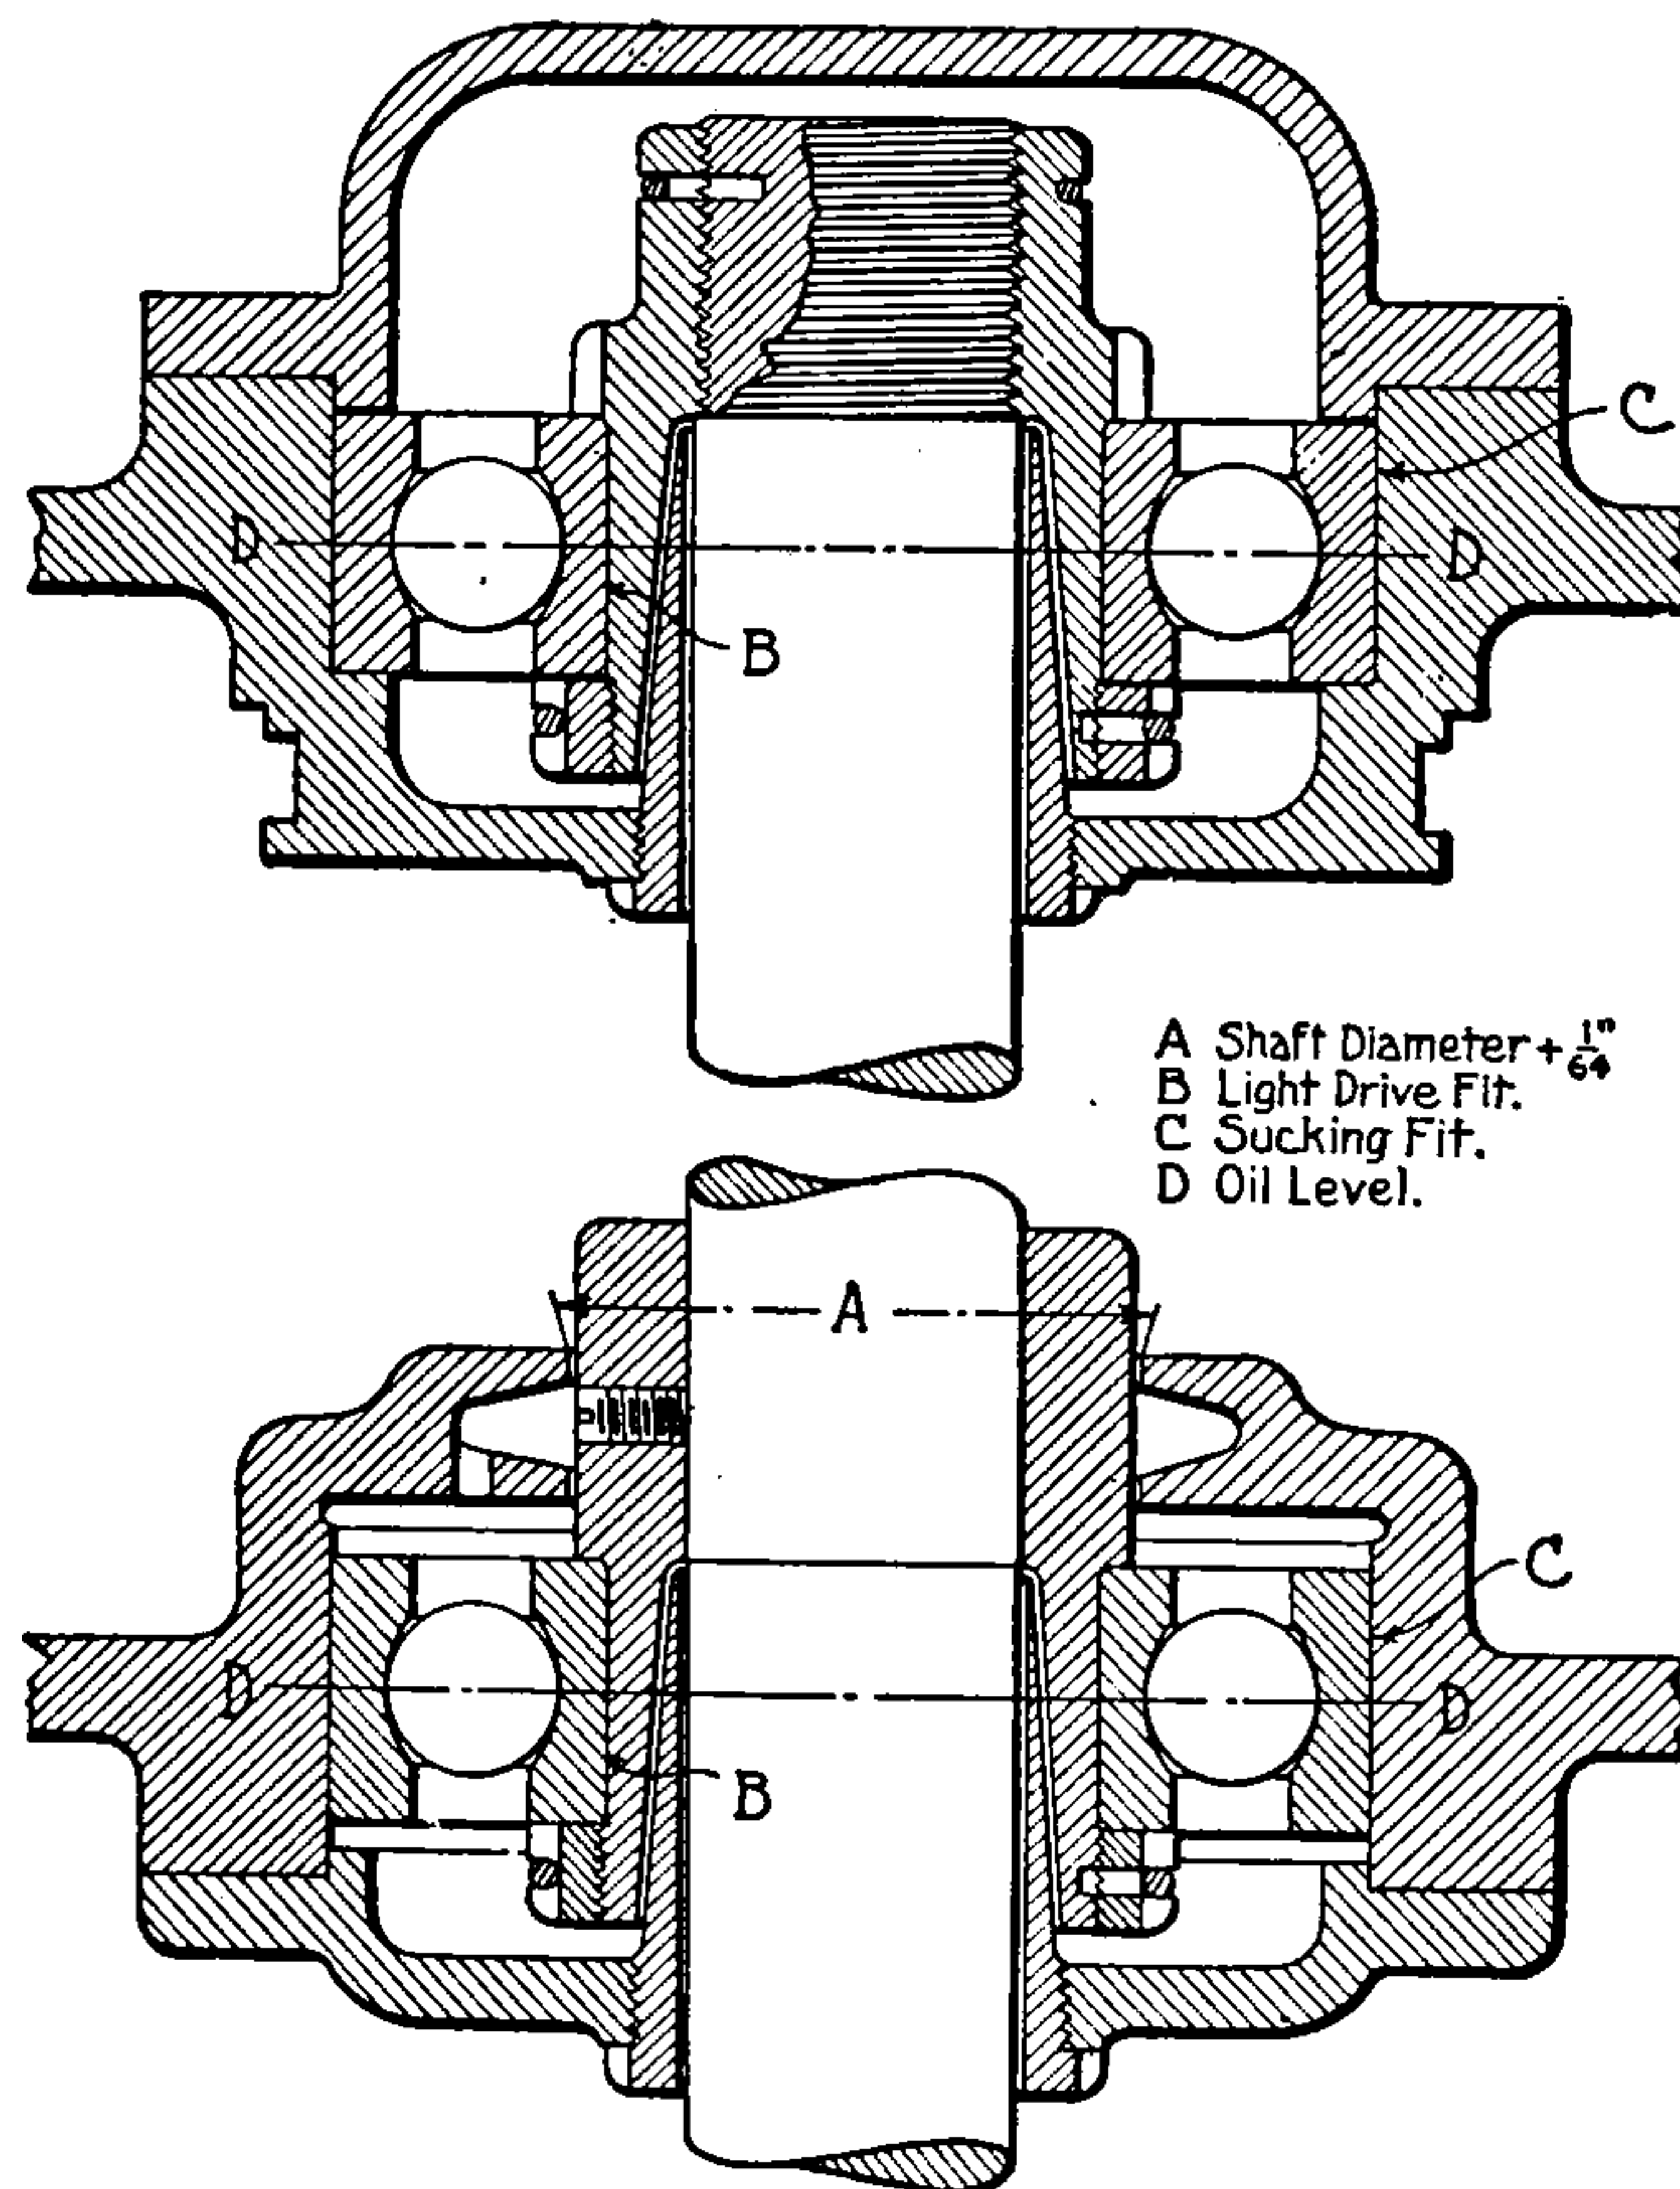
Ball-Bearing Mounting for Vertical Motor-Shaft
